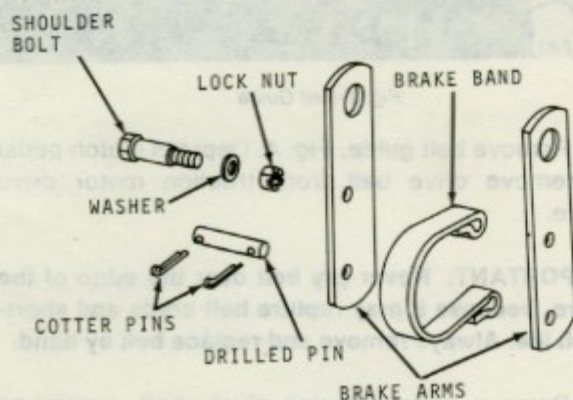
Exploded View of Brake Band (Serial No. 1001-10,000)
